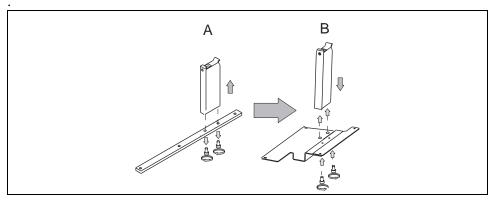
Sampler Support Disassembling and Spacer Plate Assembling
